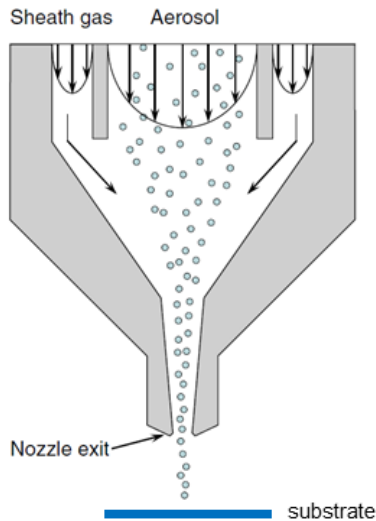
Schematic drawing of the aerosol jet print head [74]
